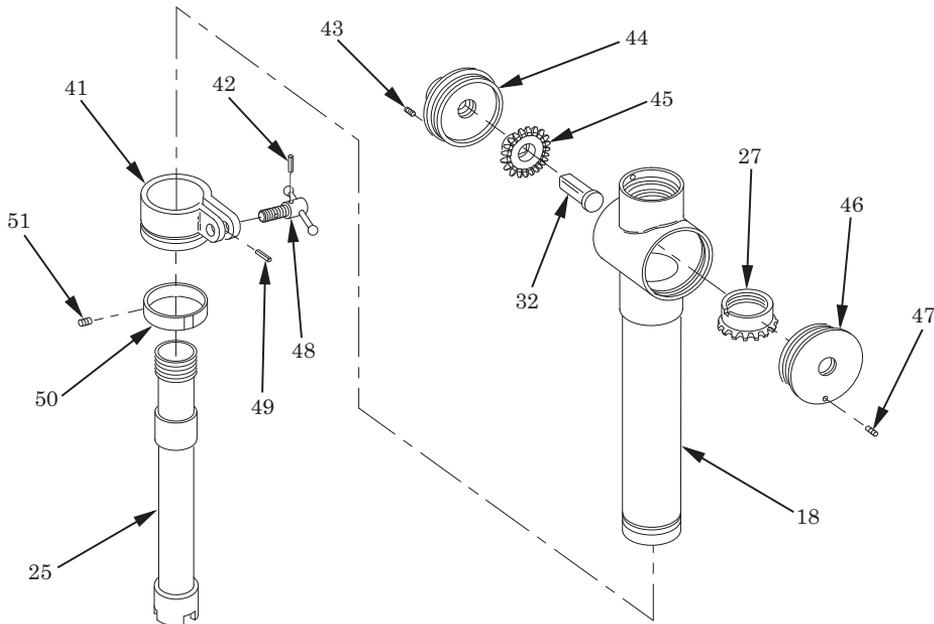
Removal of Outer Elevating Sleeve and Bevel Gears.
